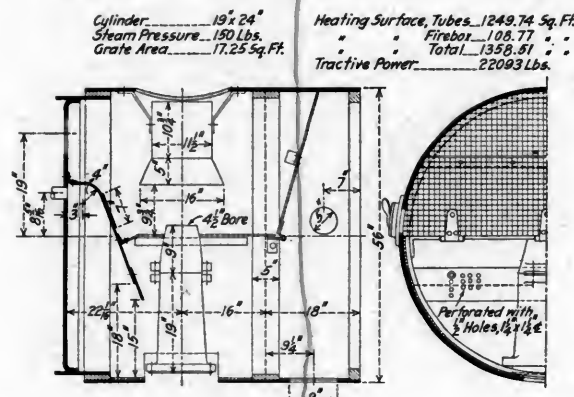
Front End Formerly Used on a Six-wheel Switcher
